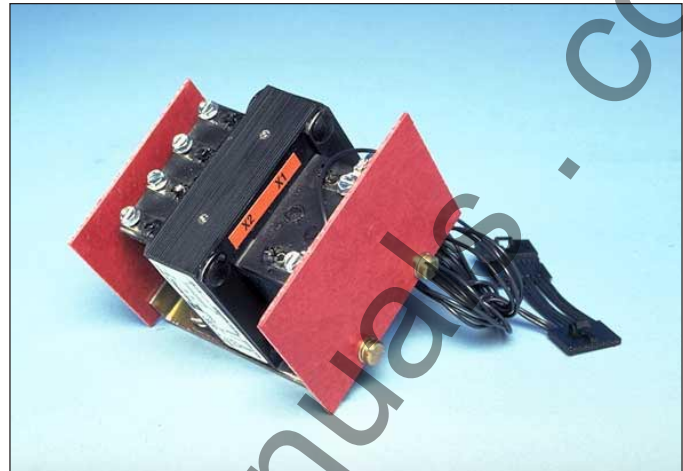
Insulation Barriers Mounted to the CPT Assembly
